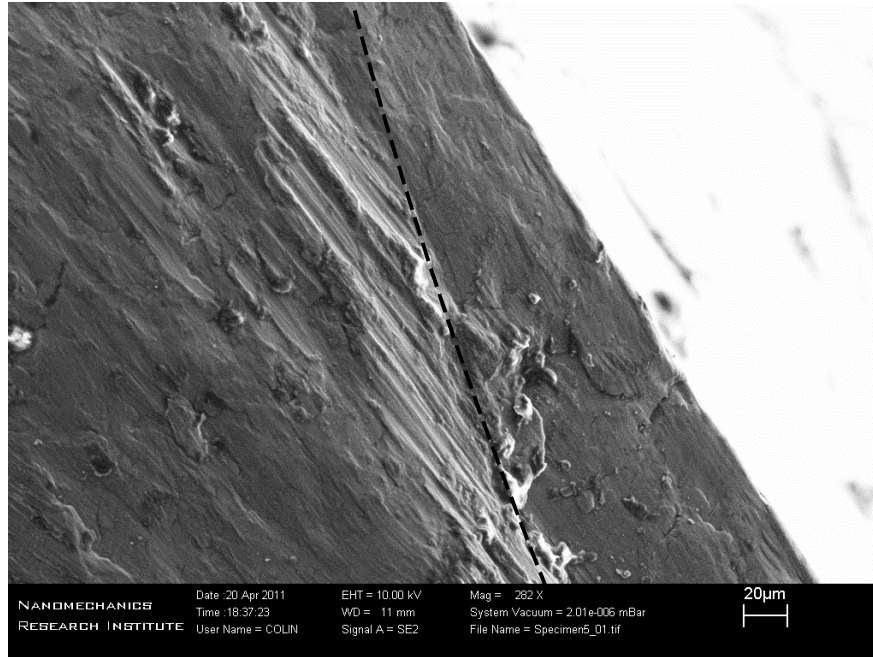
Fracture surface of shear specimen. $\gamma_a = 0.45\%$.
